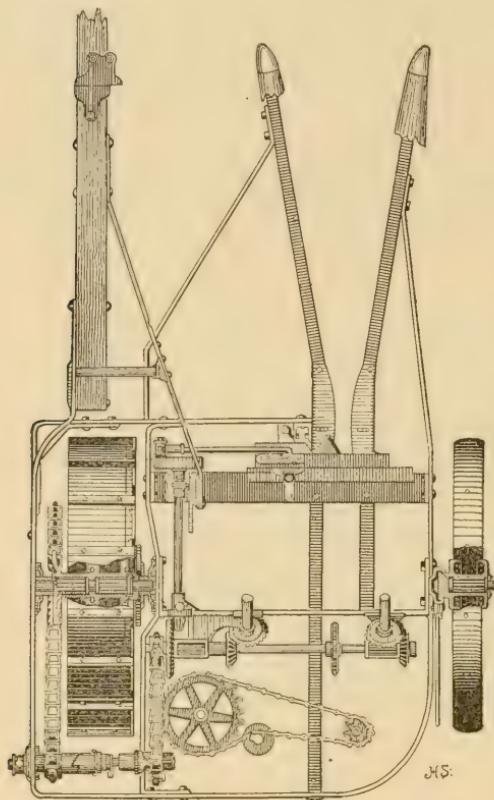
Frame of corn binder, showing mechanism for driving cutter knife, gear shaft for driving chains and binding device, and roller bearings.
